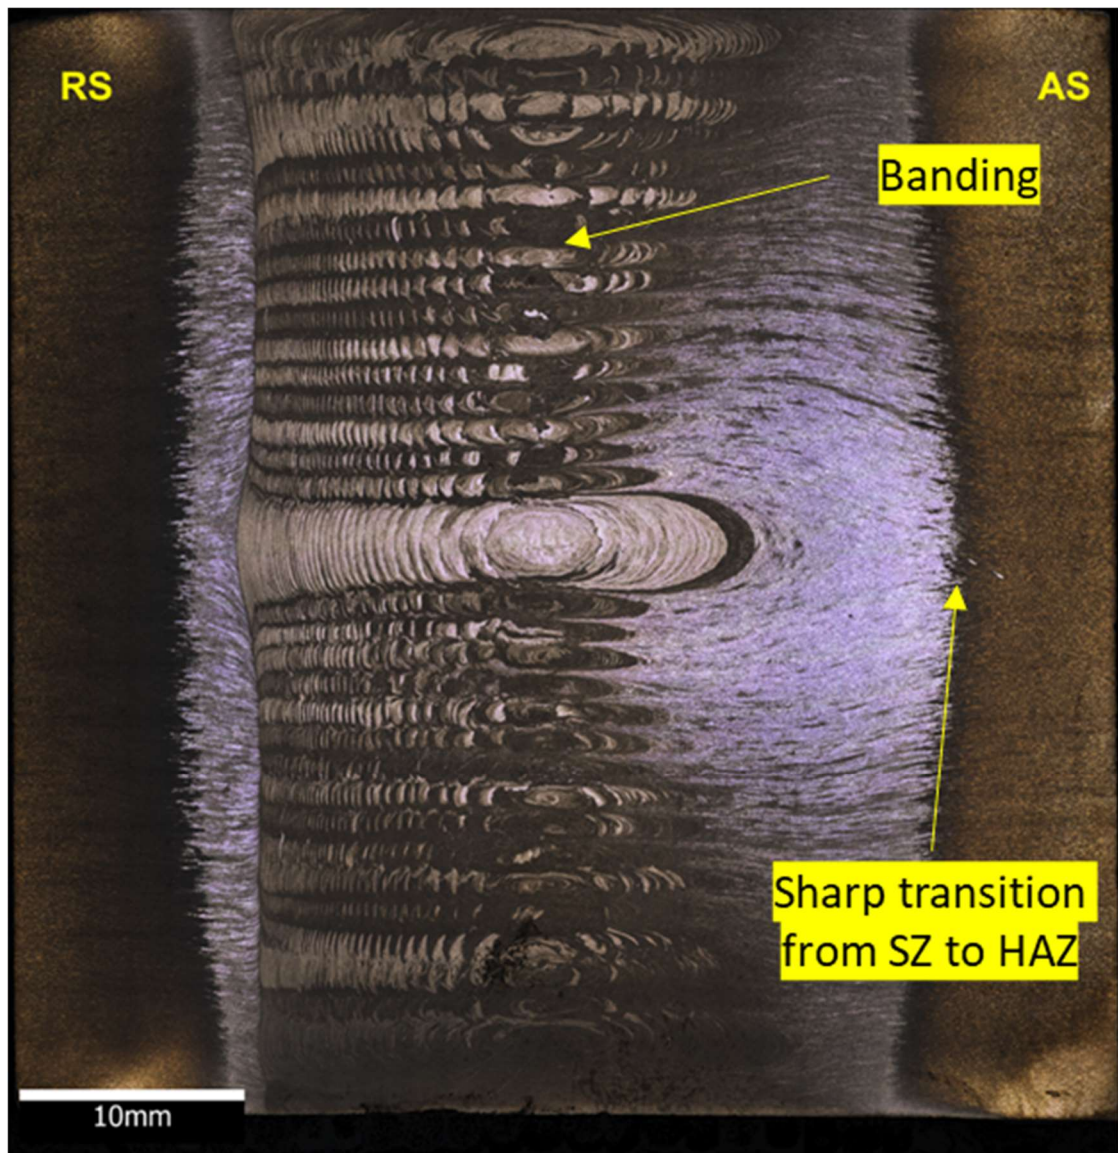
Macrograph of weld G18 - etched in Krolls reagent. Linear profile of the probe is visible, and banding is prevalent throughout the SZ. The advancing side of the weld shows a sharp transition between the SZ and HAZ.
